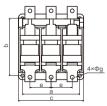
CKJ5-250 Appearance and Installation Dimensions
